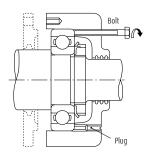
Removal of Outer Ring with Dismounting Bolts
